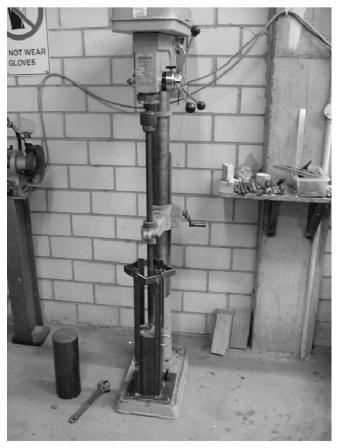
General arrangement of drill stand showing alignment jig, drill steel and 27mm ø bit.
